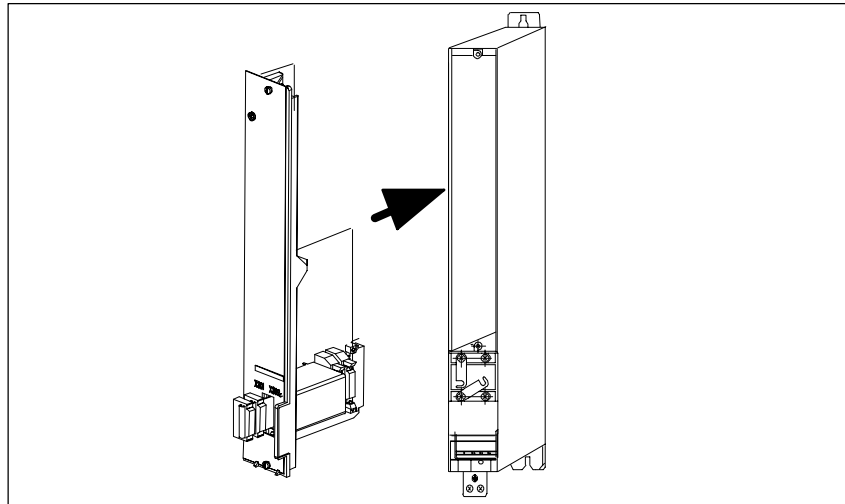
Mounting the axis expansion plug-in unit into the power section
